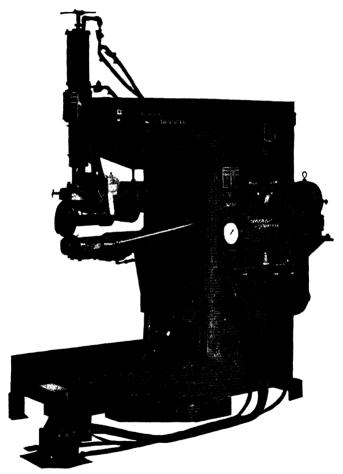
Seam welding machine (Courtesy of: The Taylor-Winfield Corporation)
